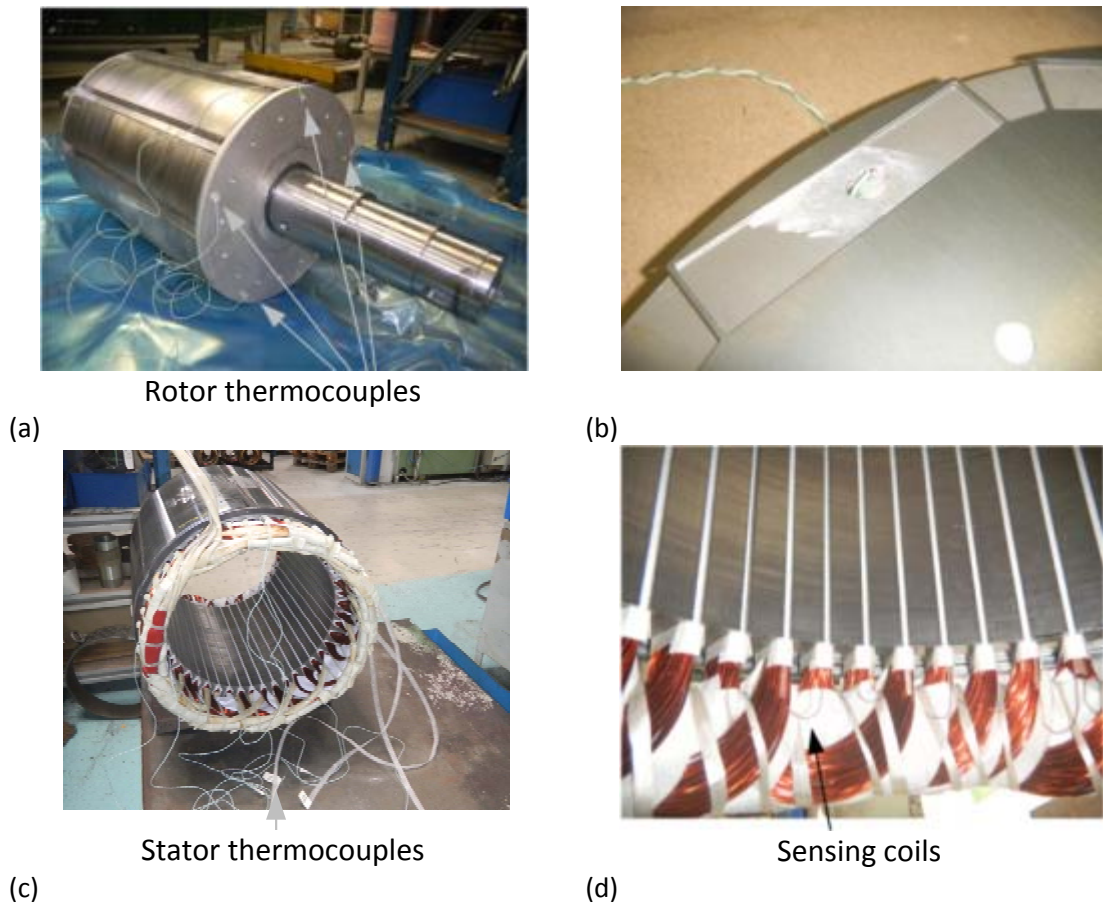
(a) Thermocouples attached to the end of the rotor magnet. (b) Zoom of the rotor thermocouple. (c) Thermocouple wire of the stator end windings and embedded coils. (d) Magnetic flux sensing coils.
